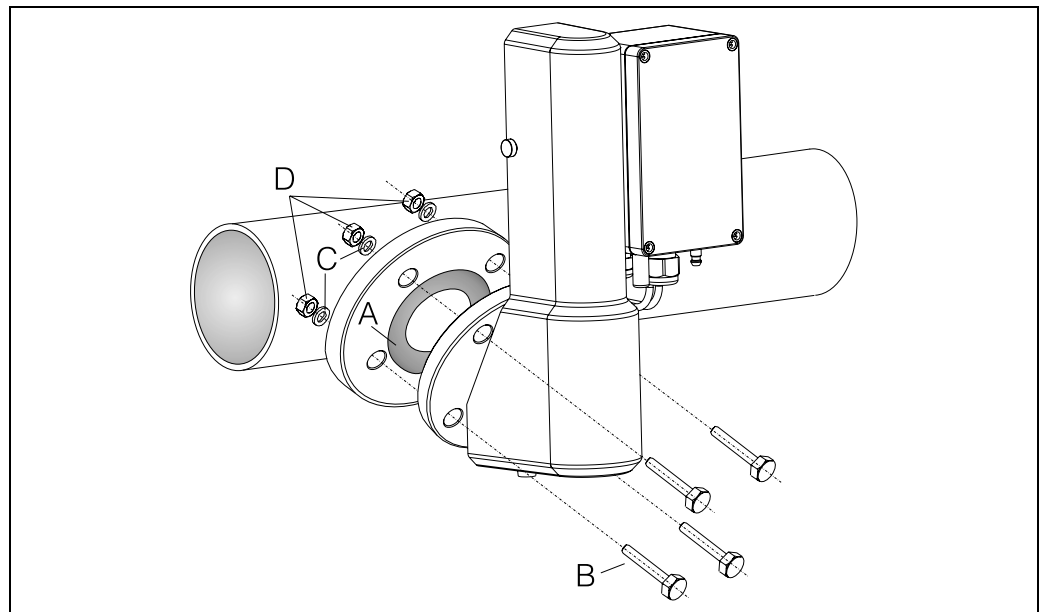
Mounting the ASP Inline assembly at the sampling position
